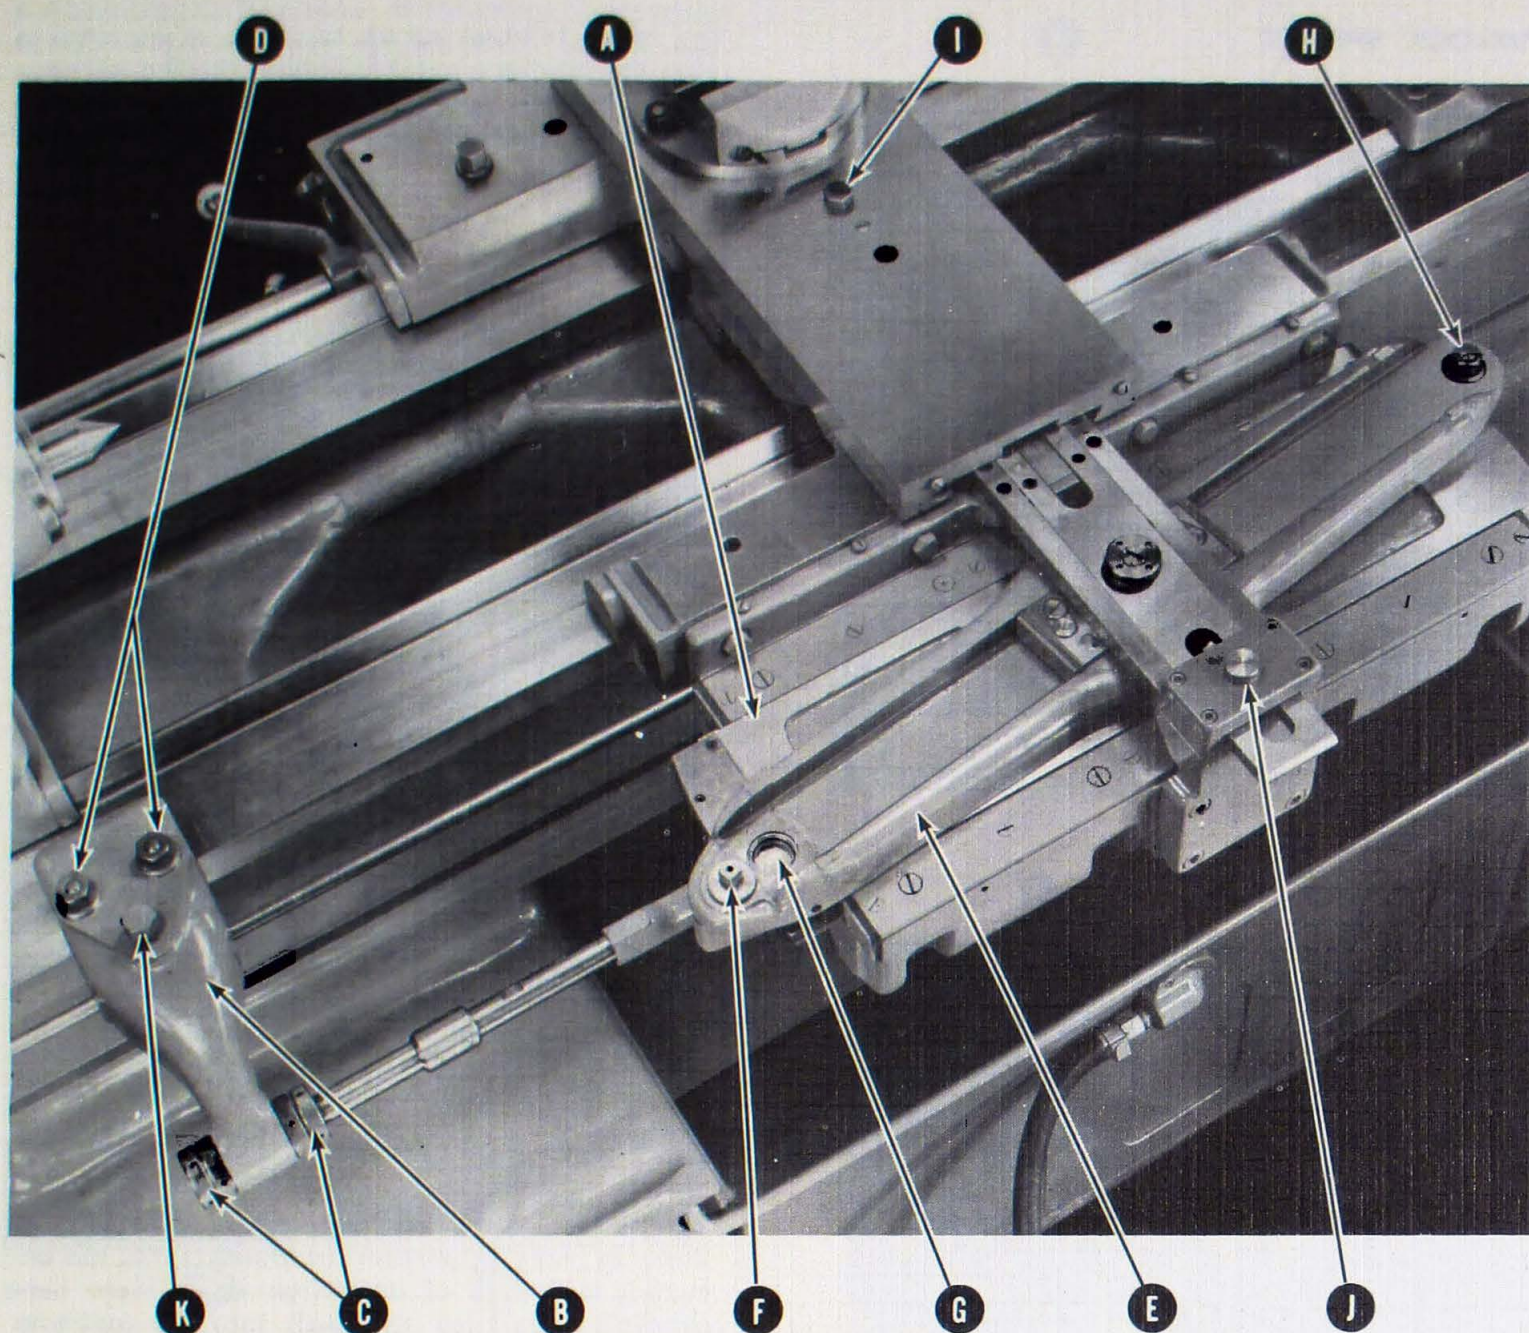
Top Top View of Anti-friction Bearing Taper Attachment
